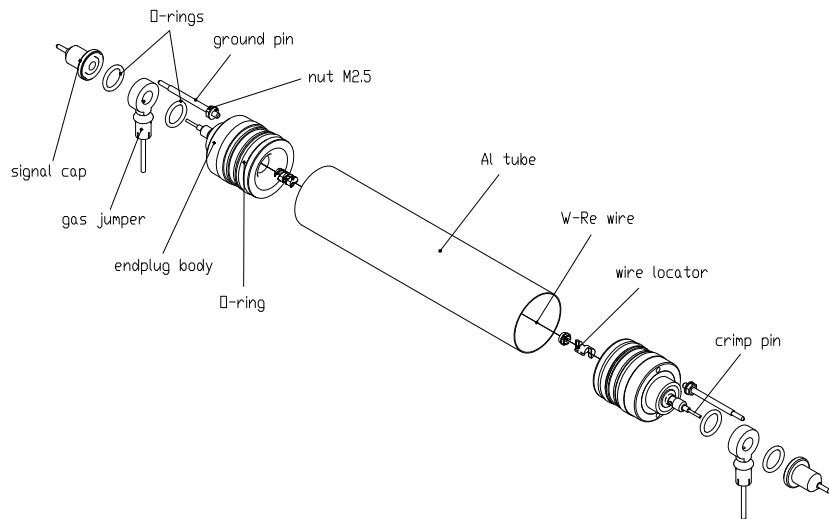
Exploded view of a single ATLAS muonsystem drift tube taken from [11].
